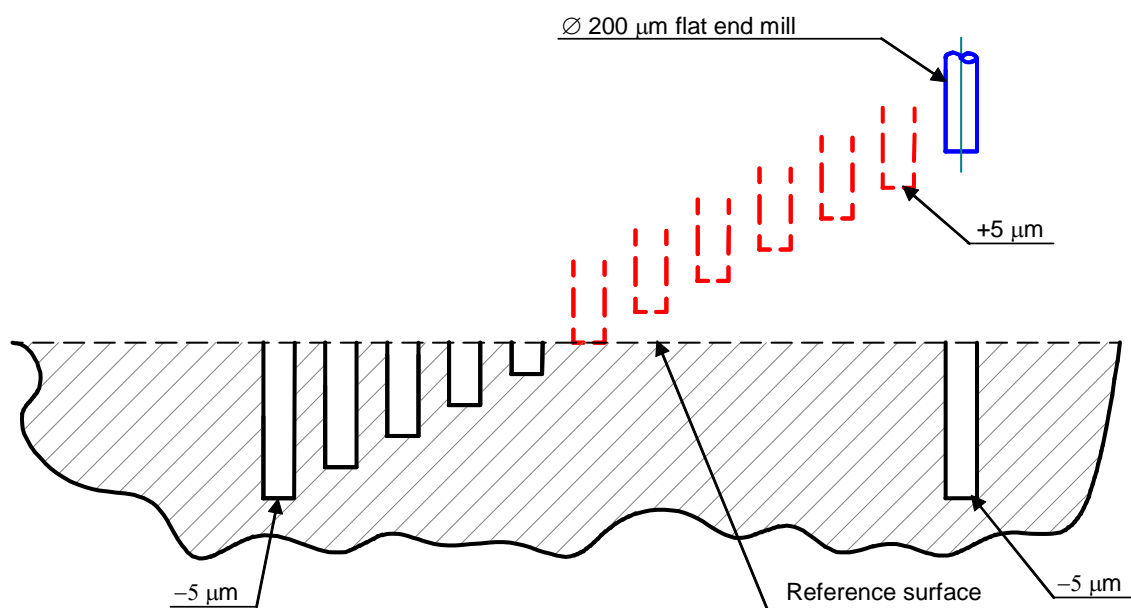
Sketch representing the layout of the surfaces to be generated during the test.
